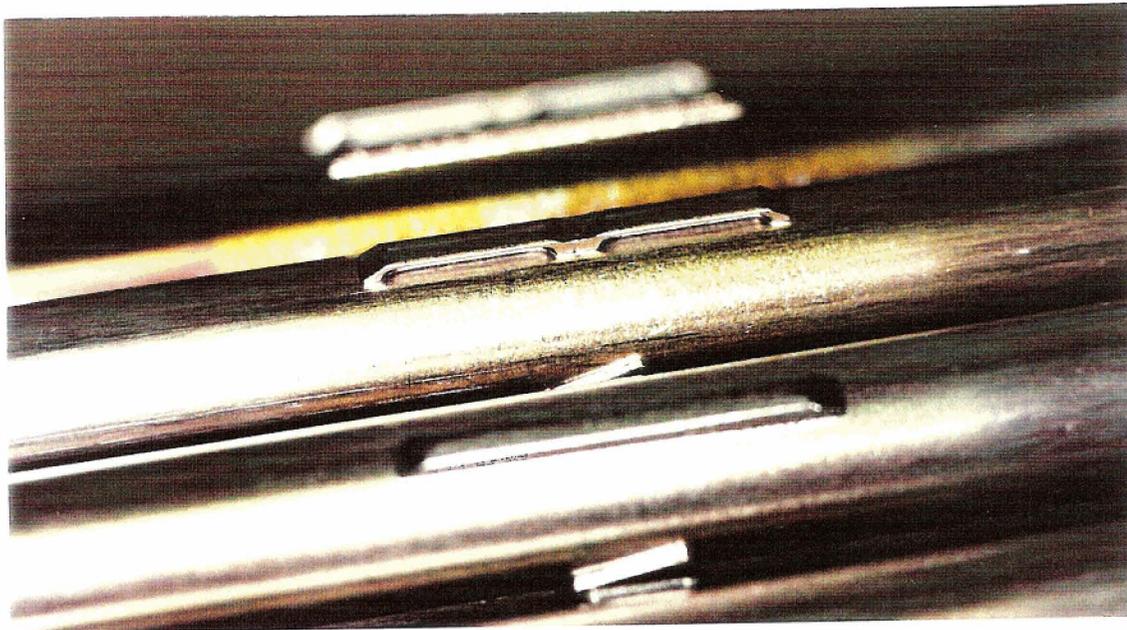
T-PAD BEARING PADS AS INSTALLED ON A CANDU BUNDLE
